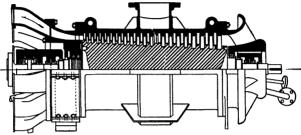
Cross section of Westinghouse compressor of 2,000-hp gas-turbine plant. Inlet at the right, exhaust to combustion chamber inlets at the left.
